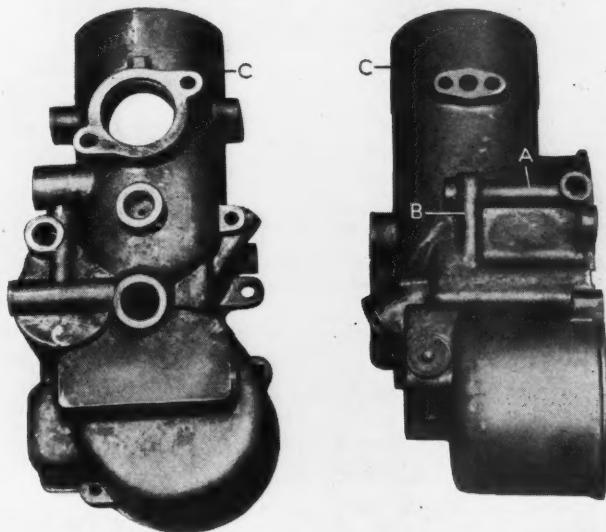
Die-casting Produced in Movable Die that has Cores Sliding in Five Directions and that Opens Sidewise
